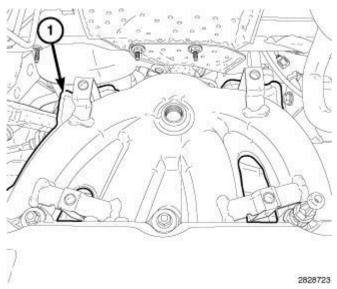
Lower Maniverter Heatshield Courtesy of CHRYSLER GROUP, LLC
